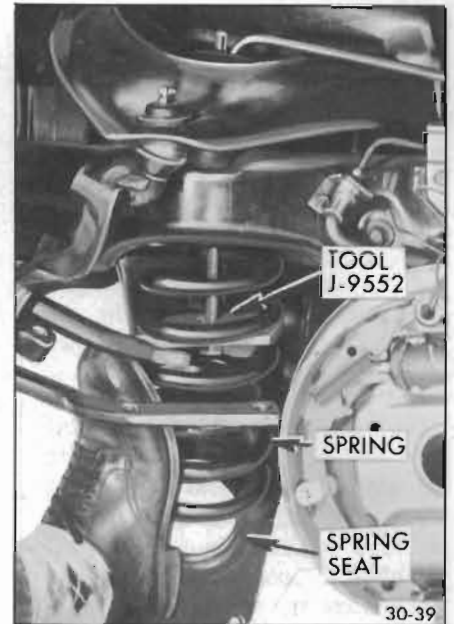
Pushing Spring onto Lower Control Arm Seat
